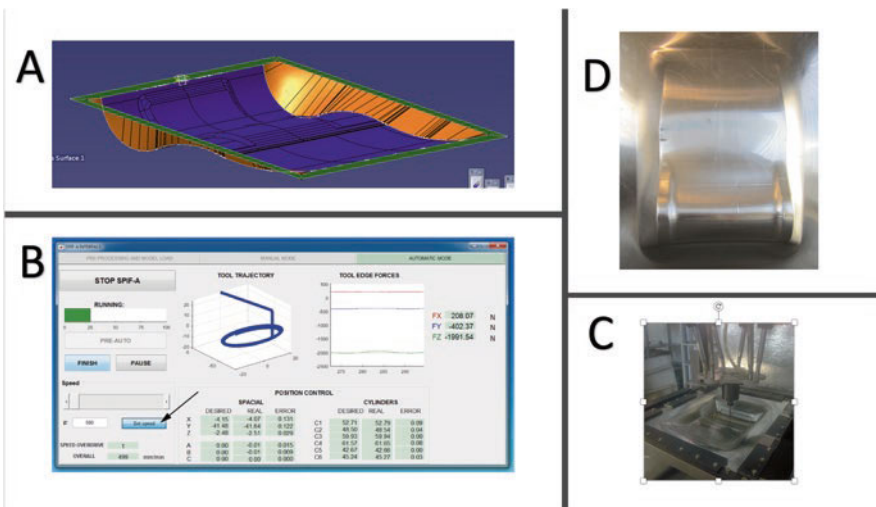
A back-seat mold for a commercial bus. From CAD (a), man-machine interface (b), forming process (c) to formed part (d)
